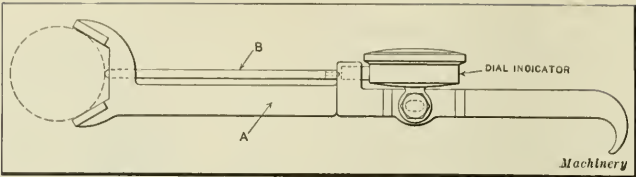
Three-point Dial Indicator for testing Crankpin Bearings, which can be applied while Work is in Motion
